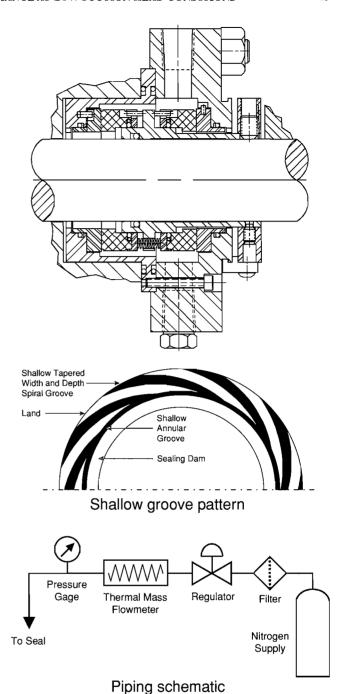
Noncontacting Gas Seal for Pumps Used in Laboratory Testing.
